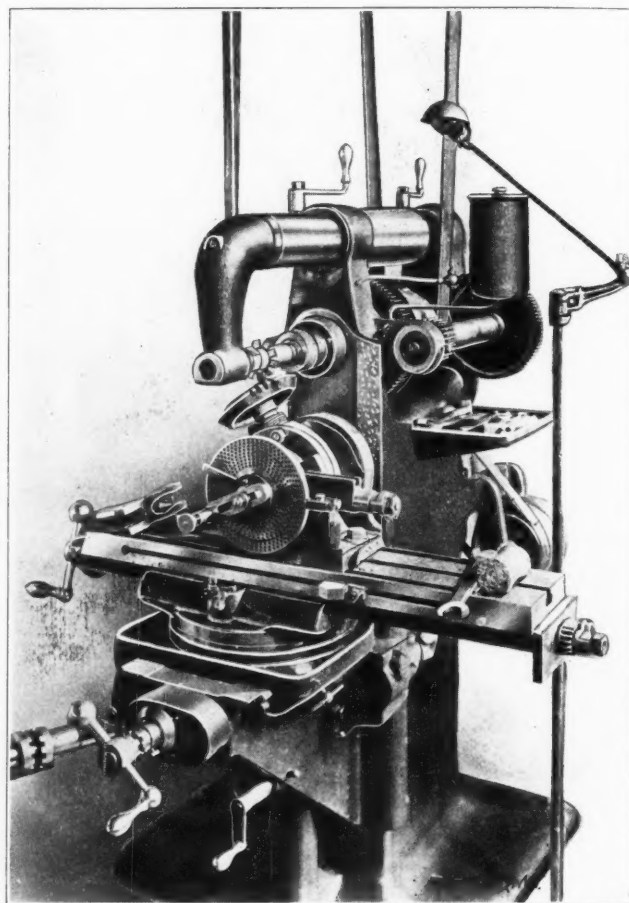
General View of Machine as Arranged for Cutting Bevel Gear.
